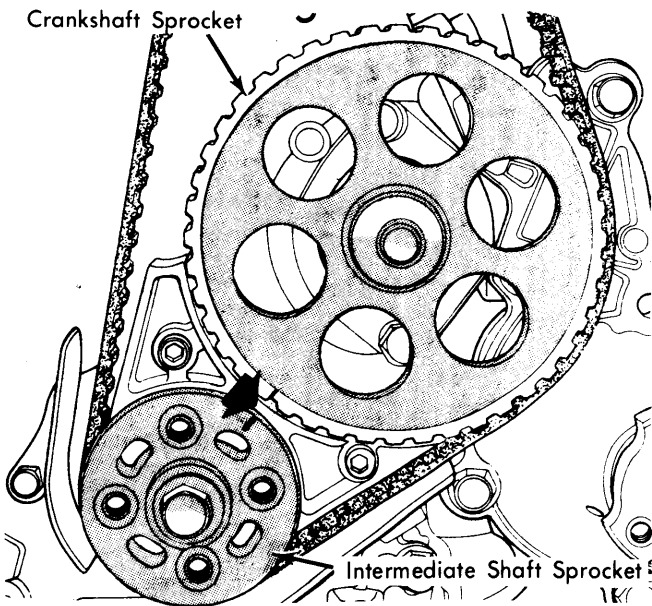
Crankshaft and Intermediate Sprocket Alignment Marks.
